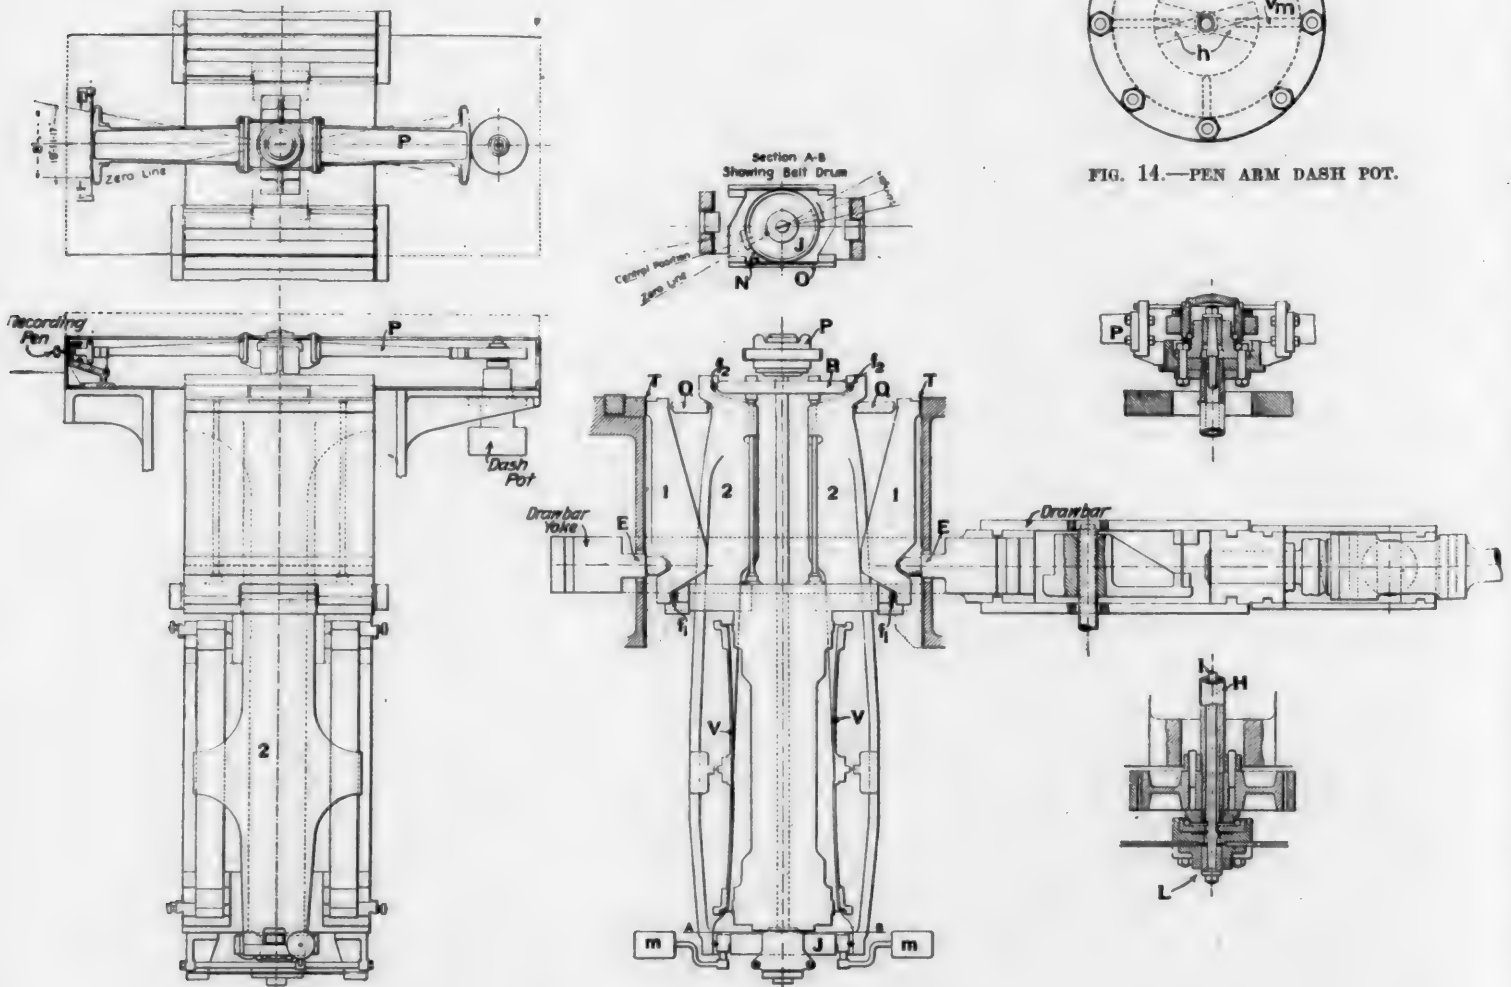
DYNAMOMETER WEIGHING LEVERS.
